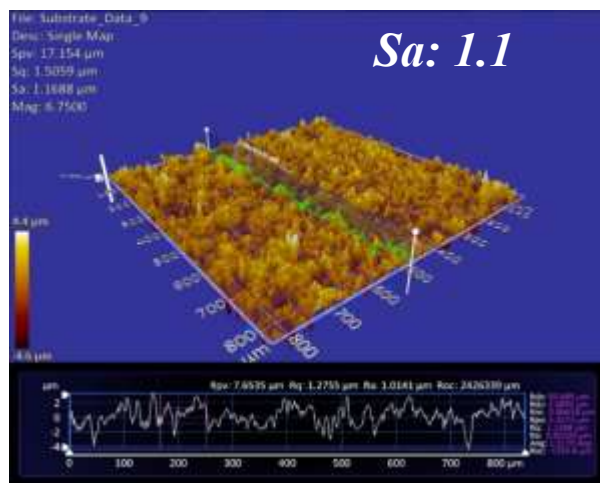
H13 Machined Substrate (950, 1100, 1250 J/mm<sup>3</sup>) (5mmx10mm)
